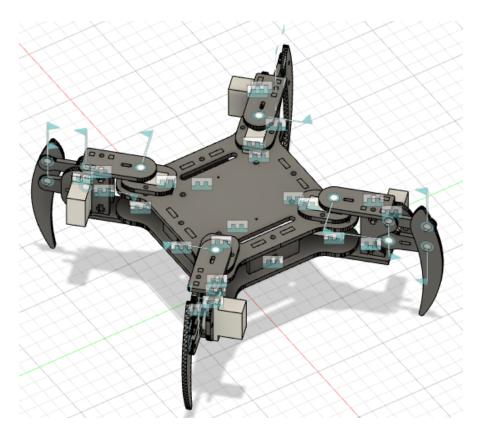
CAD model of the MePed assembled using AutoDesk Fusion 360
